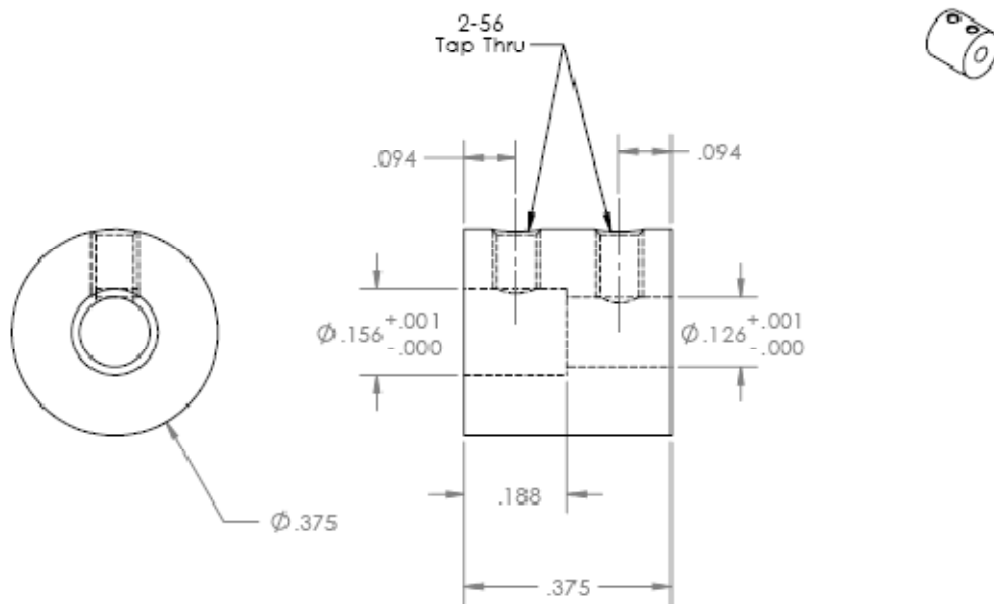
CAD drawing of the fixture connector between the solenoid plunger and the connecting tube or pillar.
